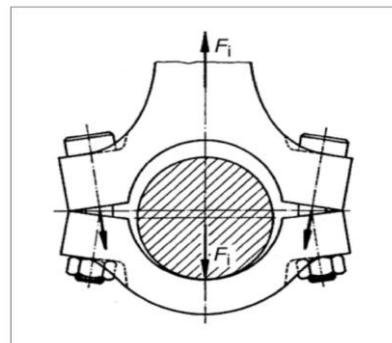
Horizontal close-in, bolt bending and gap opening caused by inertia force.
